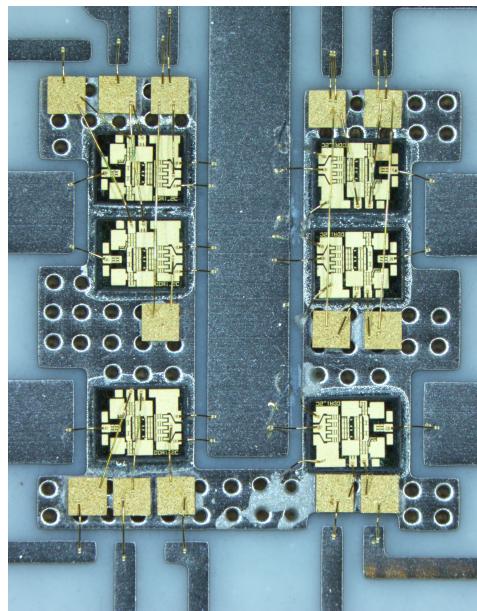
Photograph of assembled DDRi_2C chips
